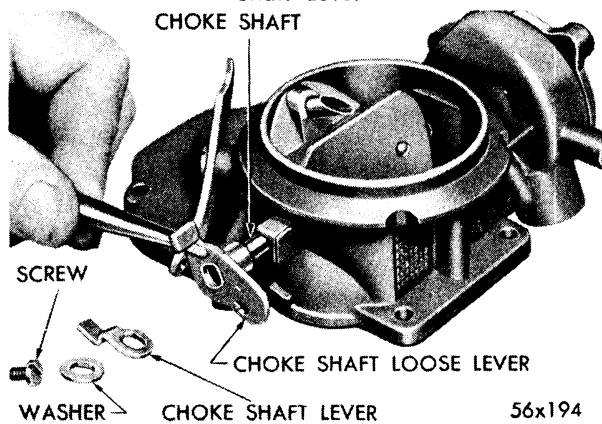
Removing or Installing Choke Shaft Loose Lever
